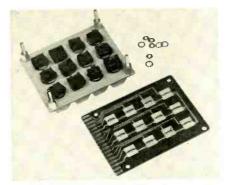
PC PATTERN for a keyboard. Use extreme care when drilling holes for keystems.
